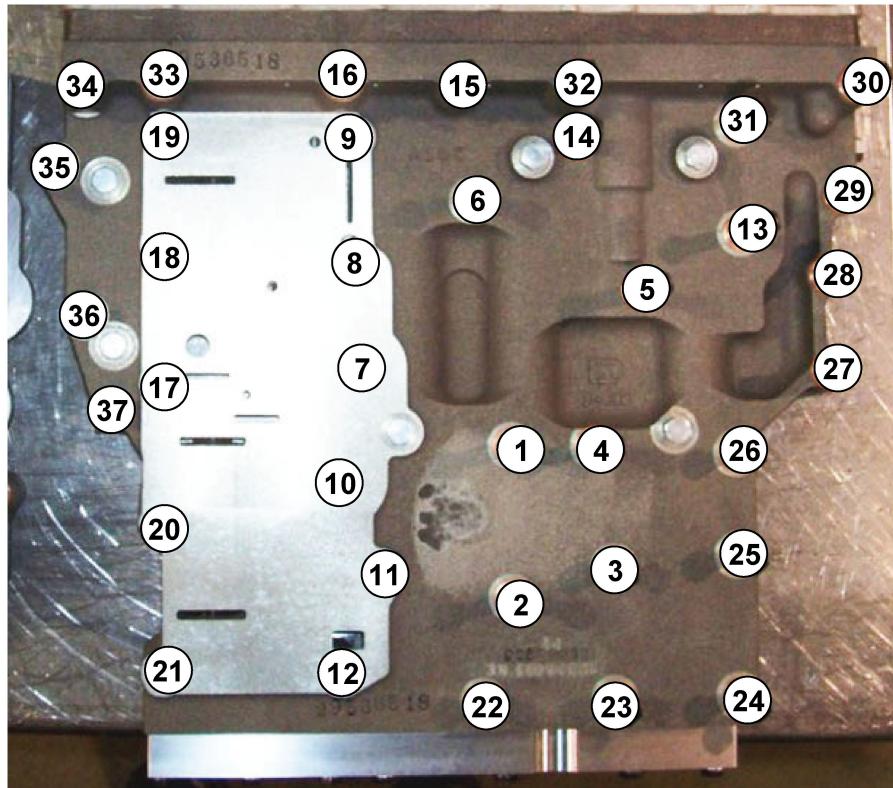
8000 Series Valve Body Assembly Torque Sequence
